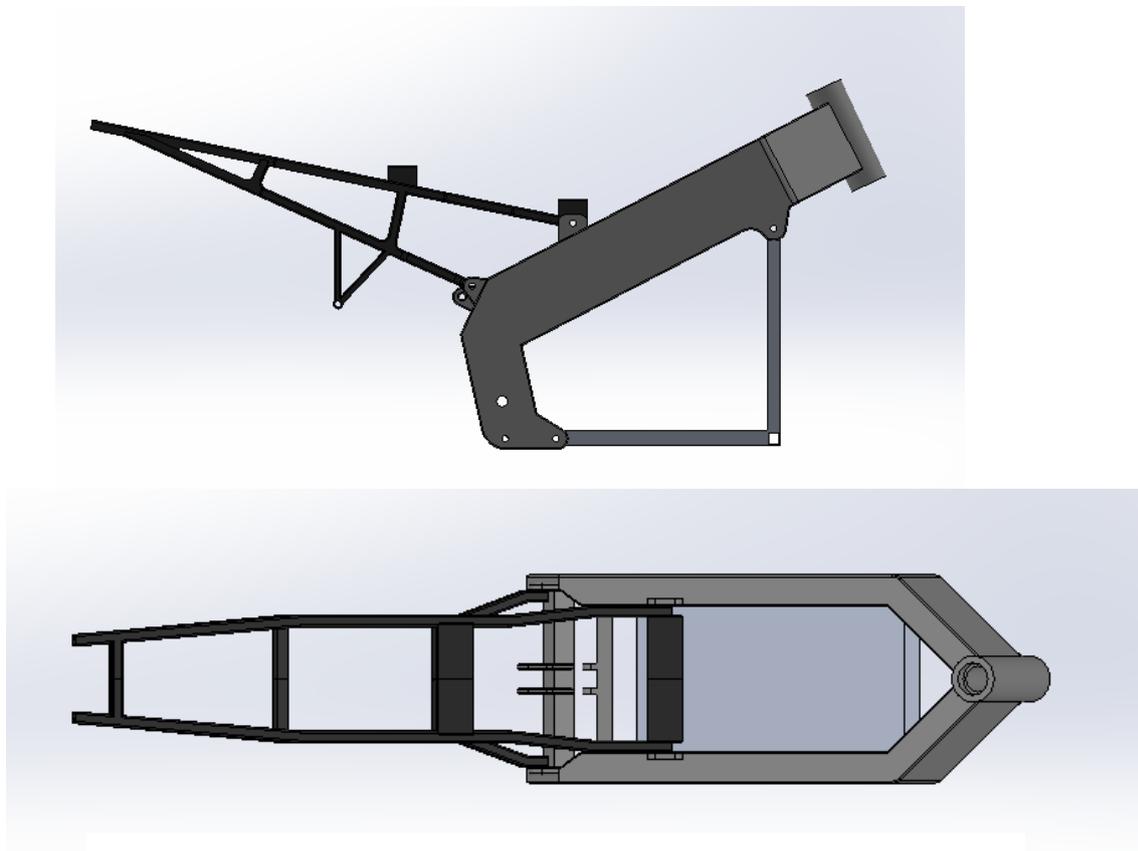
Front and top view of the frame-cradle-subchassis assembly
